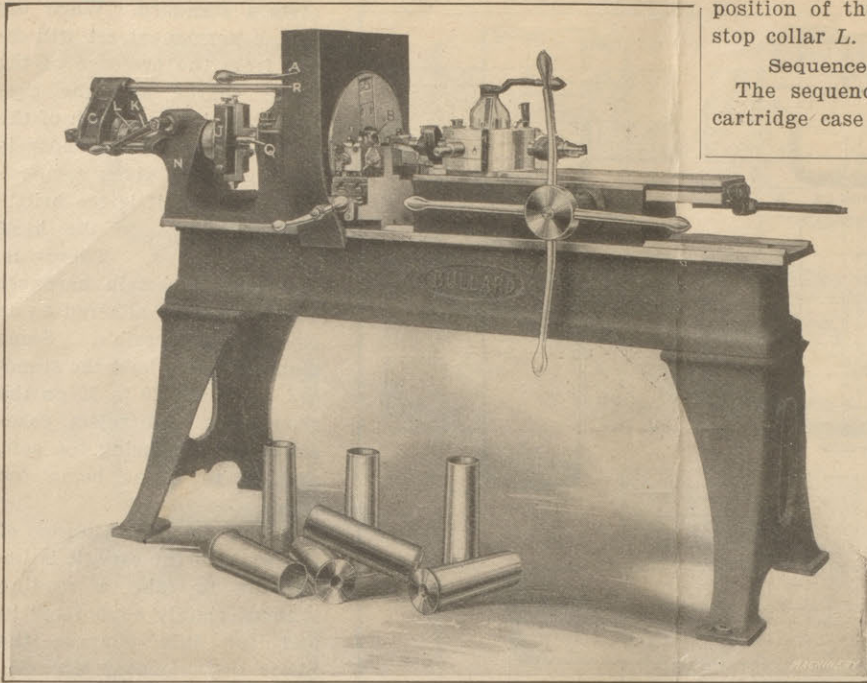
Special Shrapnel Case Trimming, Facing and Chamfering Machine designed by the Bullard Machine Tool Co., Bridgeport, Conn.
